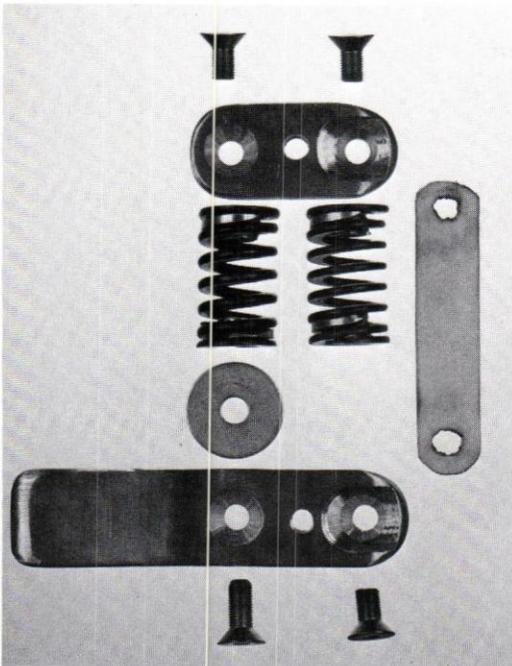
Exploded view of the D.A.S. foot-ankle system.
